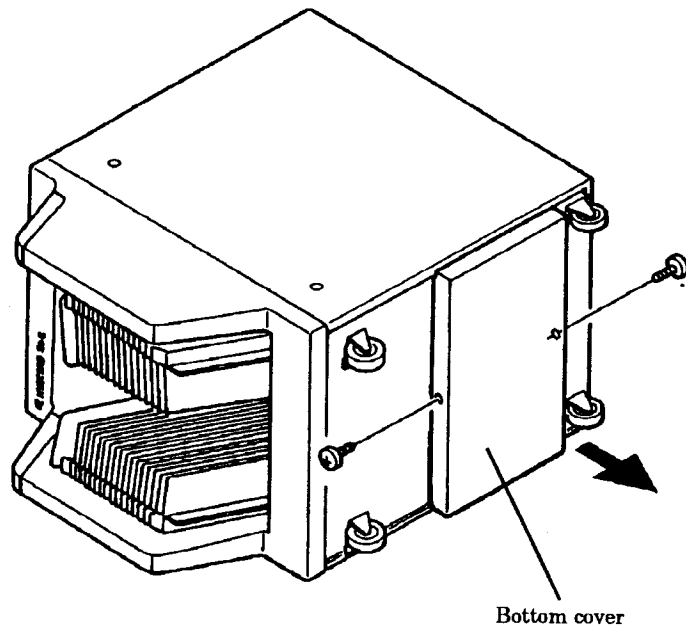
OBTAINING SENSOR CAM ALIGNMENT
